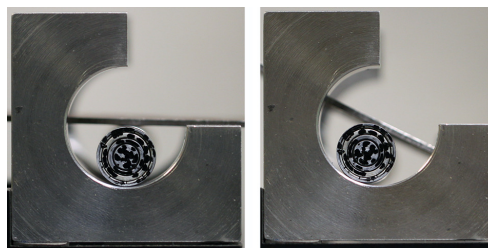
Pattern on the roller assembly used to track the rotation of the shaft and bearing outer ring.
